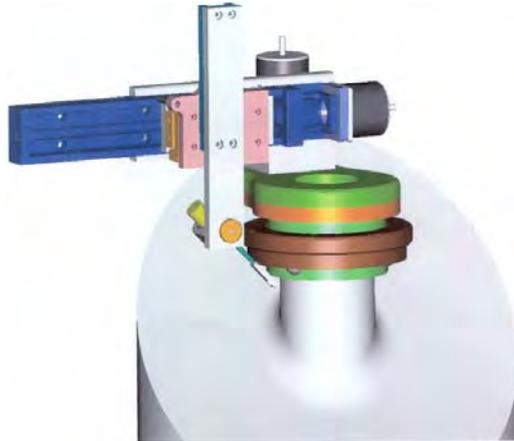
Laboratory scanner for inspection from surface of the J-groove weld.
